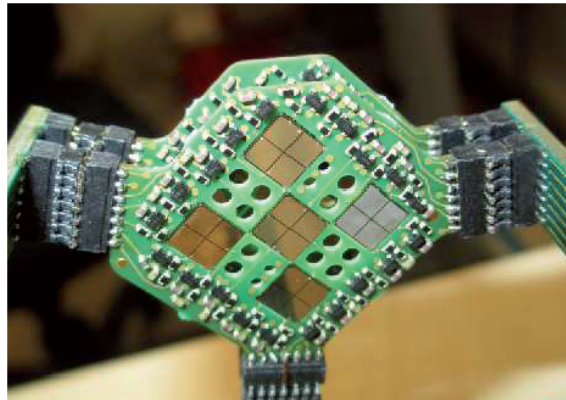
Photograph of the START detector: the nine diamond sensor plates are installed on two printed circuit boards (PCB). One PCB with five sensors is visible. the other with four sensors is located behind.
